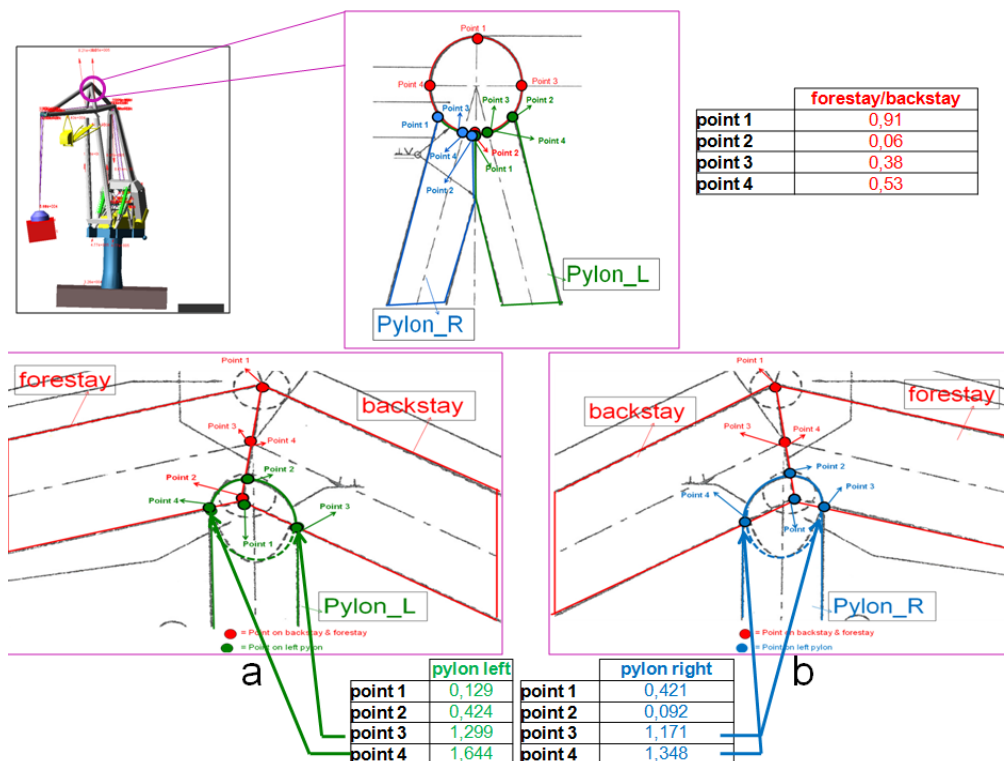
Illustration fatigue damage at tubular welded joint using MBD-FEM simulation method
